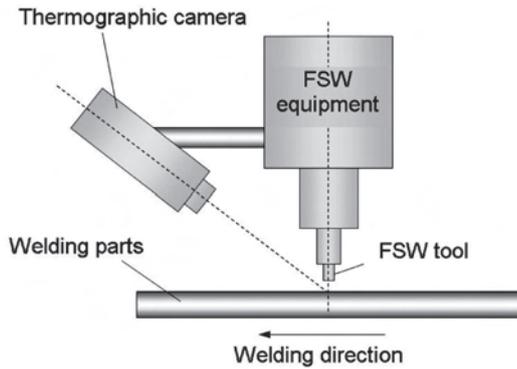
Scheme of positioning for thermographic camera on FSW machine.
